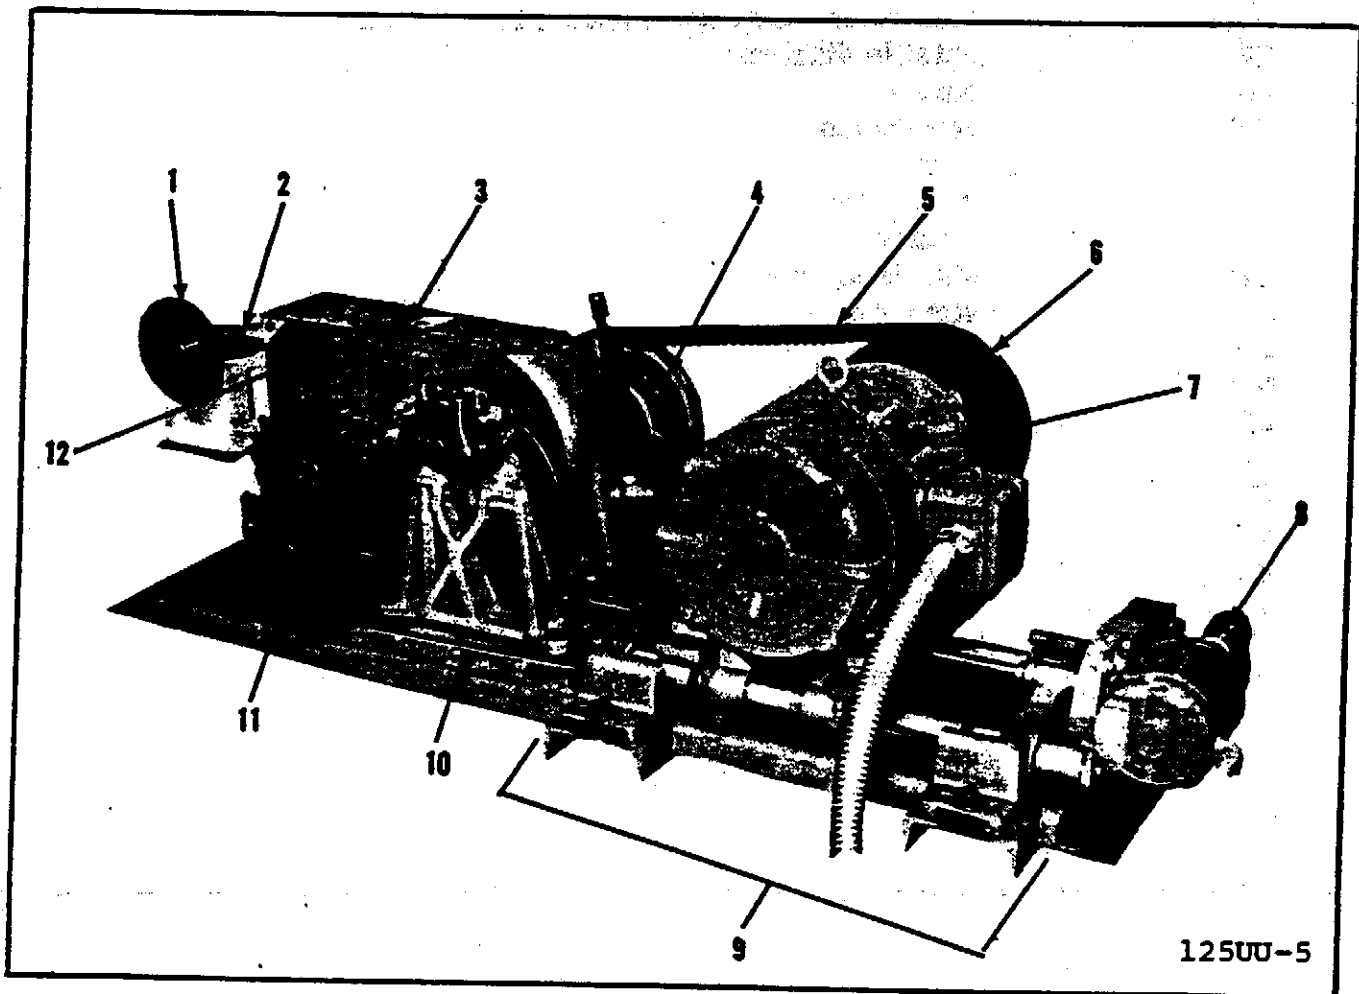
Location of Components, Ironomatic Drive, Ironer Drive Side
